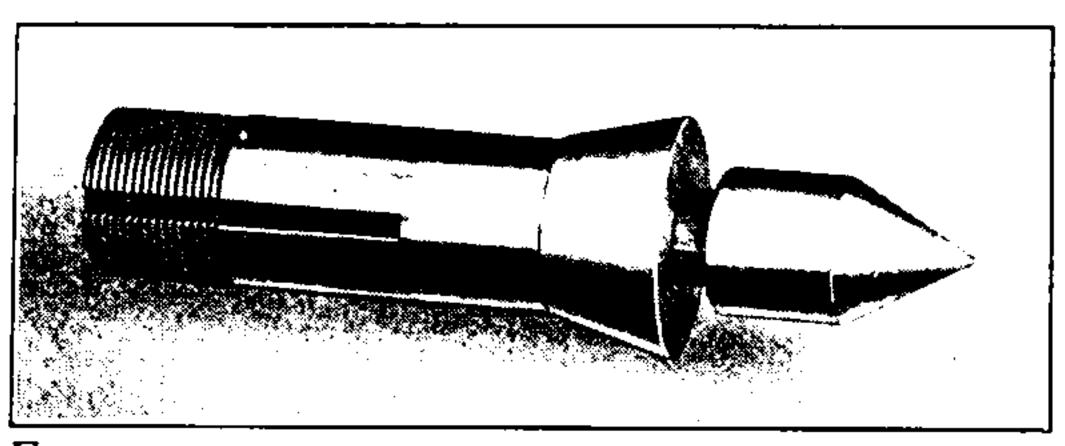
Center and Center Chuck — center has taper fit in center chuck (solid collet). Center chuck fits headstock spindle
